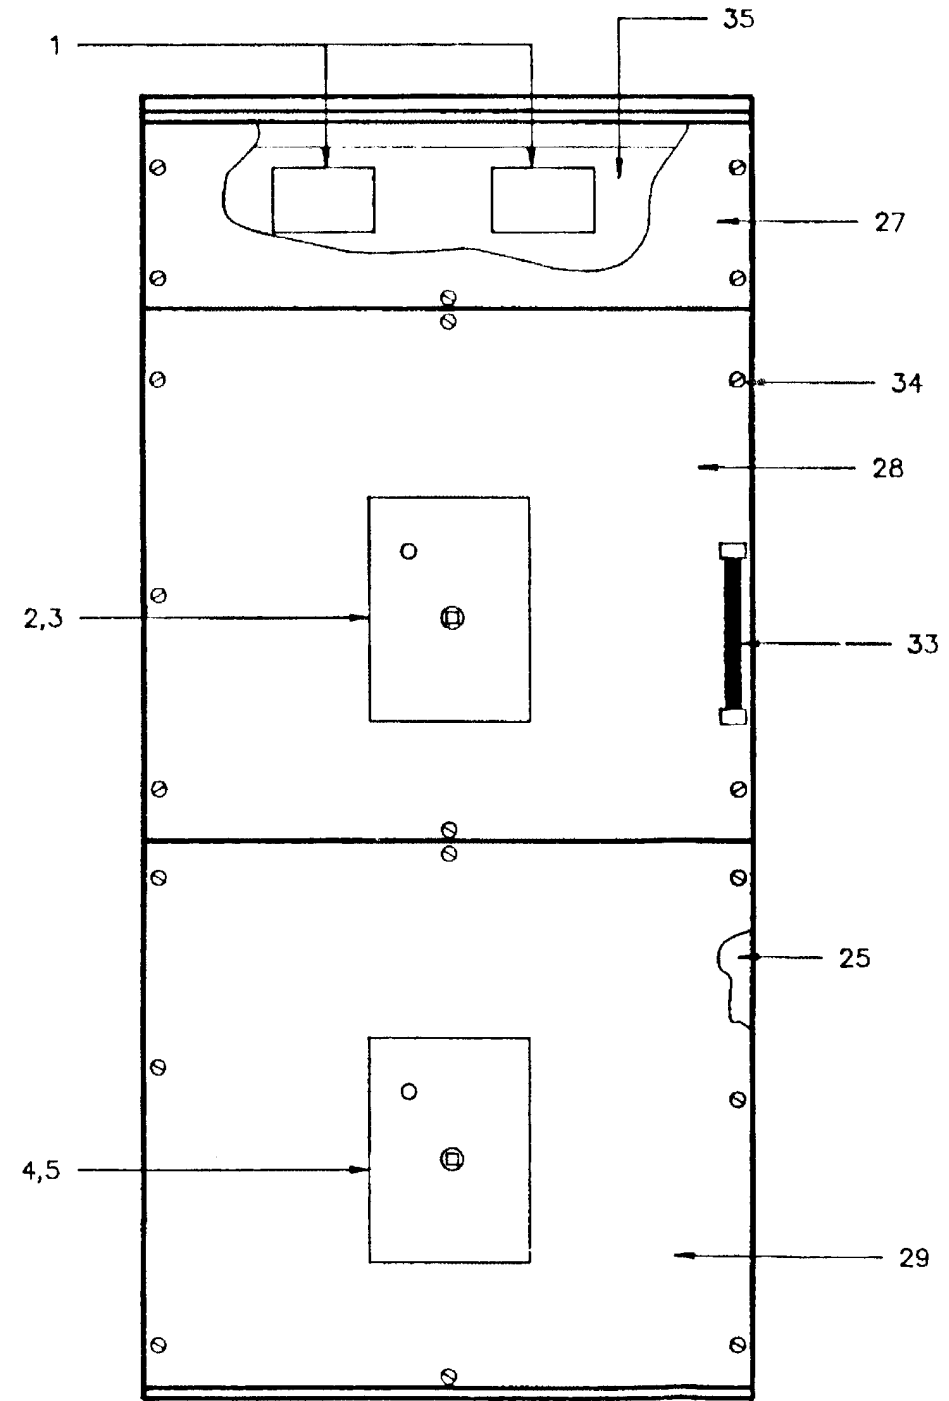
3SB Switchboard Assembly (Sheet 2 of 2)
